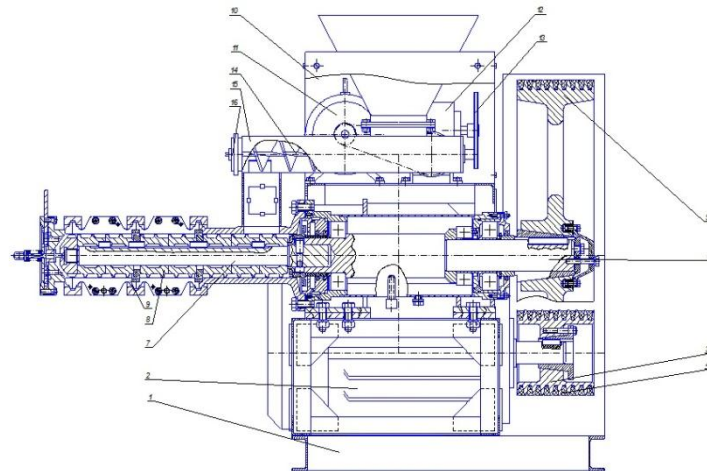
KMZ-2U extruder chart: 1–base; 2–motor; 3–driver pulley; 4–belt; 5–driven pulley; 6–shaft; 7–stud; 8–flight; 9–body; 10–frame; 11–feed drive motor; 12–gearbox; 13–chain drive; 14–drive feed screw; 15–housing; 16–bearing assembly.
